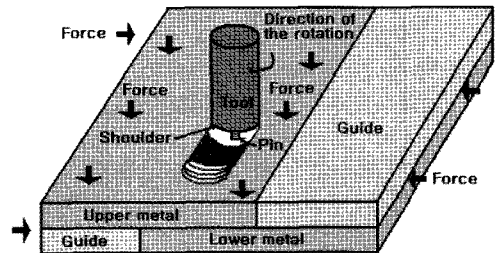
Typical weld tool and process parameters used in the FSW process
